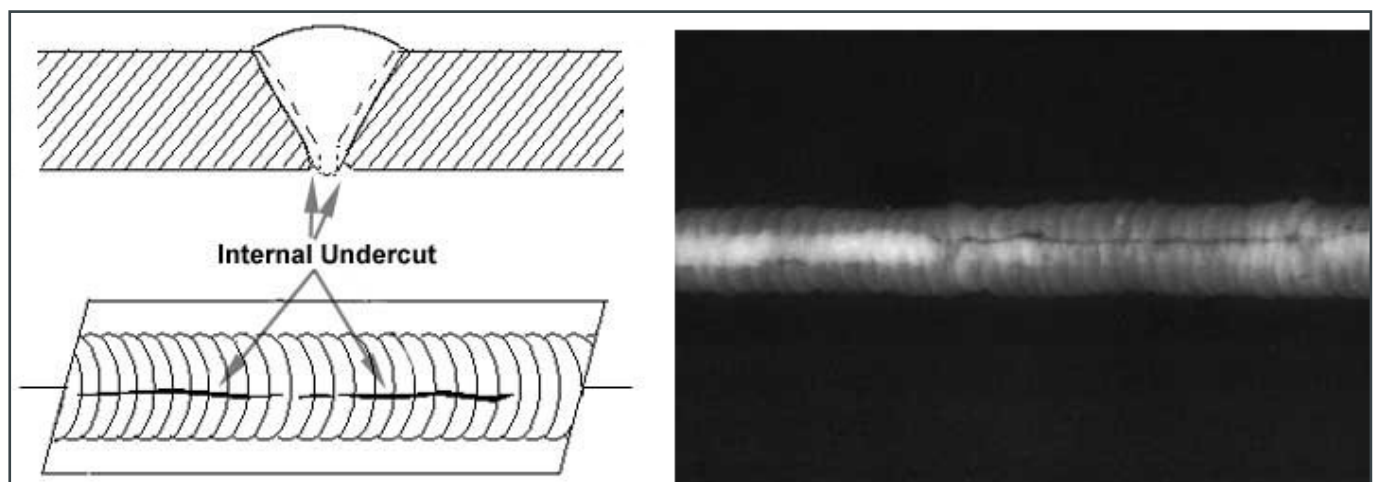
Example of view of girth weld film showing root undercut anomaly (courtesy of www.nde-ed.org)
